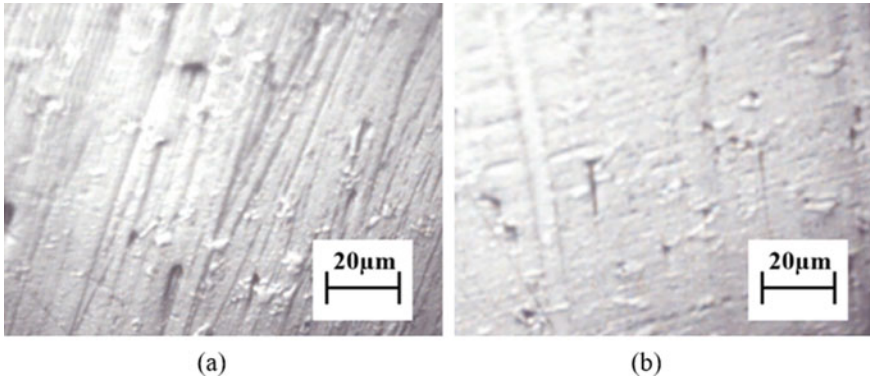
Surface topography of workpiece: a before processing, b after processing
